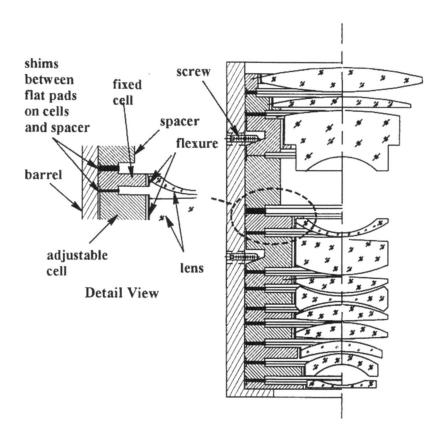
Schematic partial-section view of a lens assembly with two laterally adjustable cells. The lenses are assembled and aligned in their cells as poker chips and the cell ODs machined precisely to fit the barrel ID.
